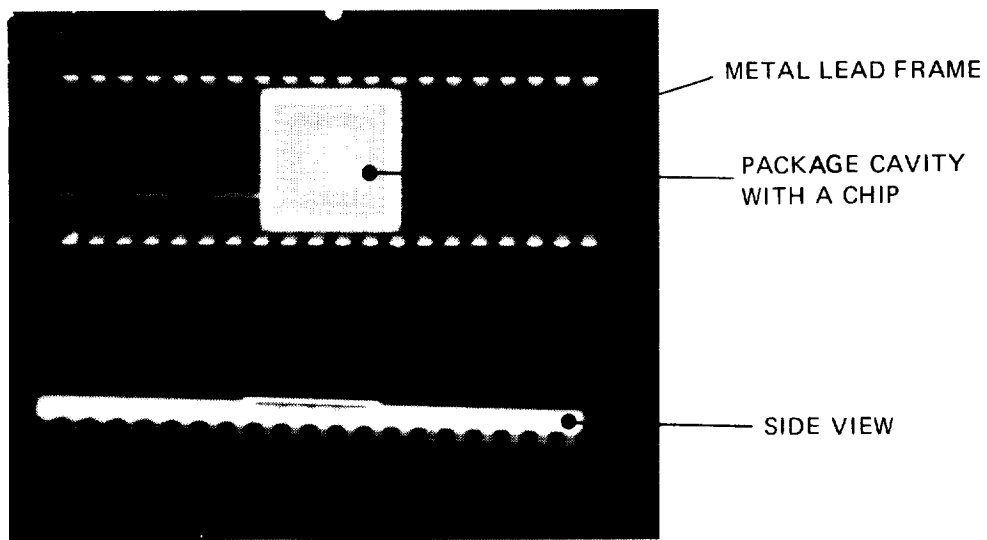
1.4X magnified top and side X-ray view of device No. 1 package lead frame and die cavity.
